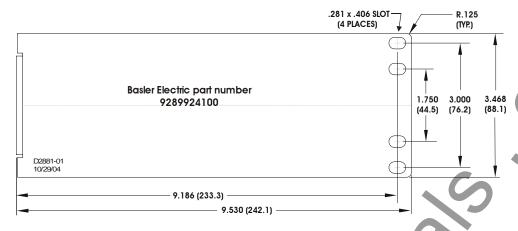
Adapter Bracket for Mounting a Single Relay in a 19-inch Rack
